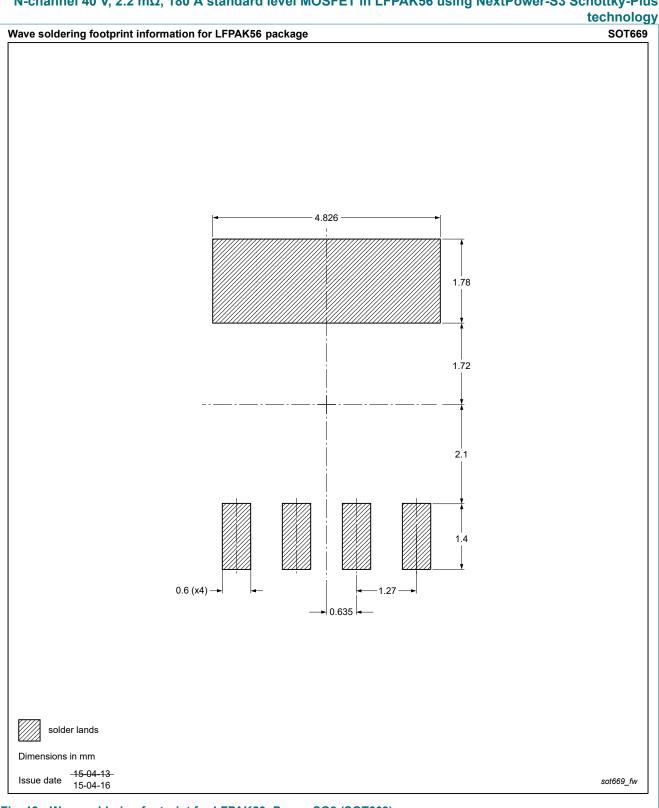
Wave soldering footprint for LFPAK56; Power-SO8 (SOT669)
